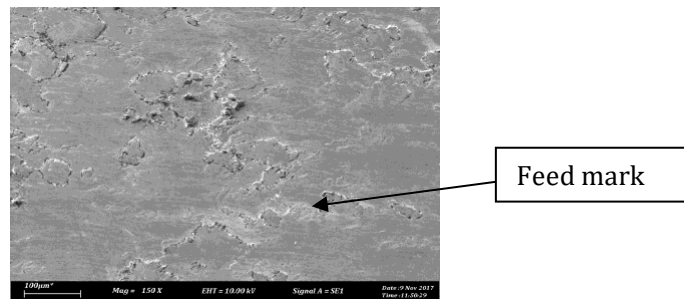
Feed mark on workpiece surface observed at standard run 7 (120 m/min cutting speed, 0.4 mm/tooth feed rate and 0.5 mm depth of cut).
